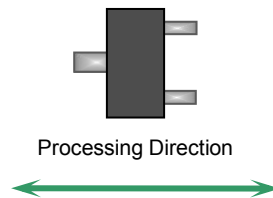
Orientation of SOT-23 packages undergoing wave soldering.
